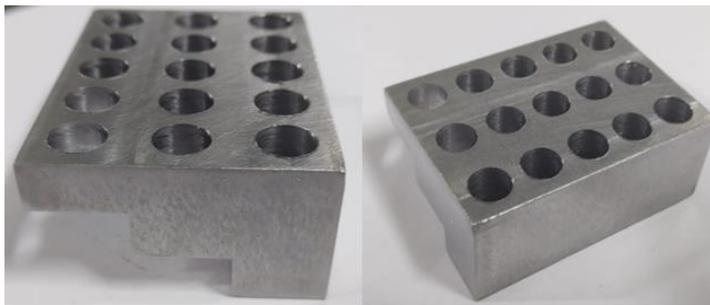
Hole exit images of drilled holes without tool runout after maintenance
